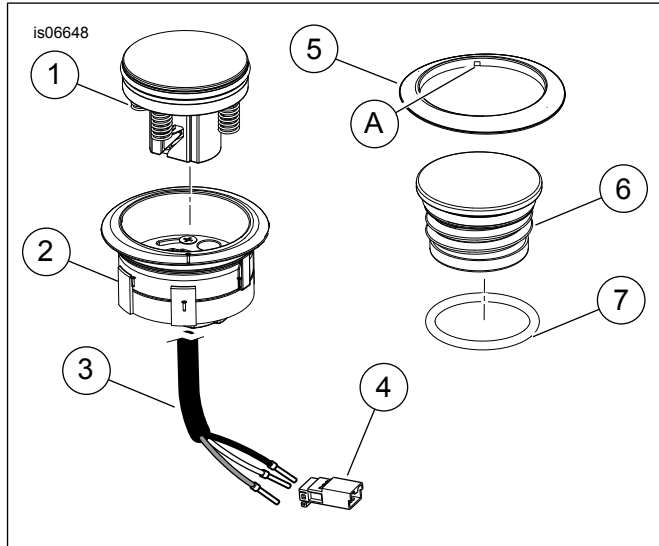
Service Parts; Flush-Mount LED Fuel Gauge and Gas Cap
